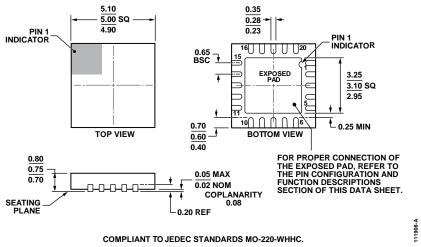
20-Lead Lead Frame Chip Scale Package [LFCSP_WQ] 5 mm × 5 mm Body, Very Very Thin Quad (CP-20-9) Dimensions shown in millimeters
